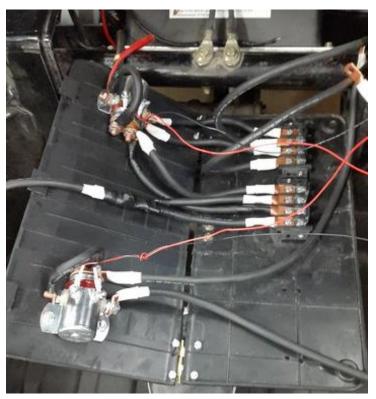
Access panel with the motor relays and terminal blocks mounted to it.
